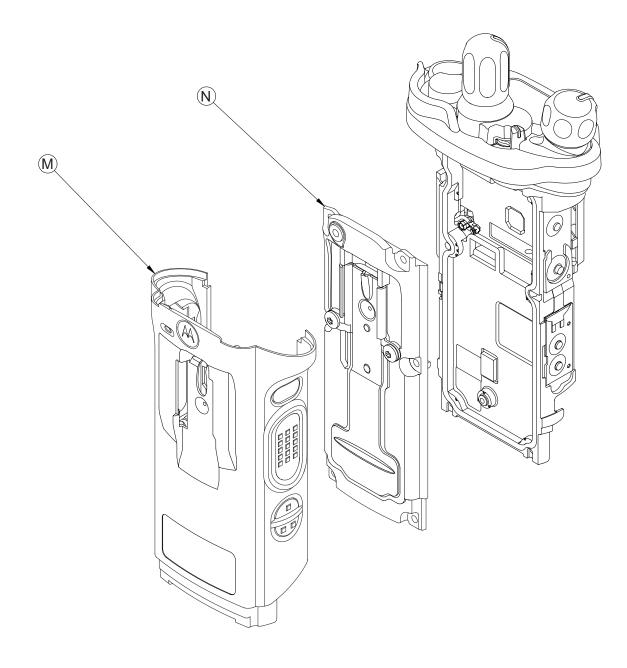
APX 6000XE Top Display Partial Exploded View
